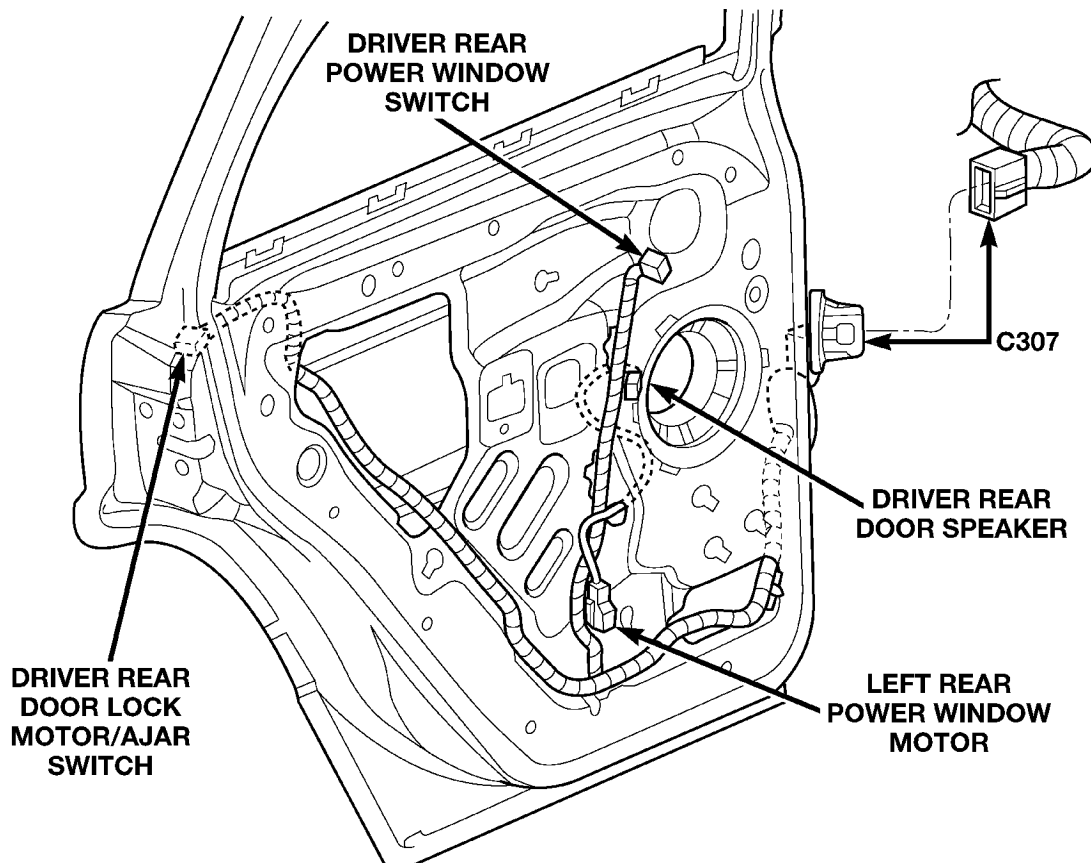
Door Connections (Rear Door, Driver Side) — LHD
